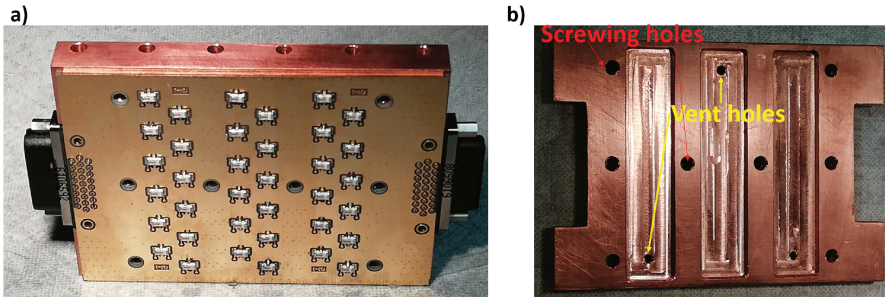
a) Bottom side of the board with the metal cage around. b) Inner side of the board cage. The big holes are for screwing the cage and the board together. A small vent hole in each groove allows vacuum to enter inside the cage, and is also helpful for the cooling of the board.
